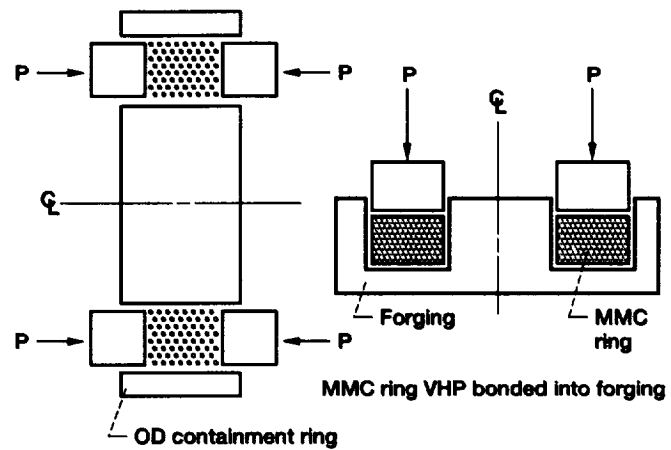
Fabrication of integrally bladed MMC rotor.
